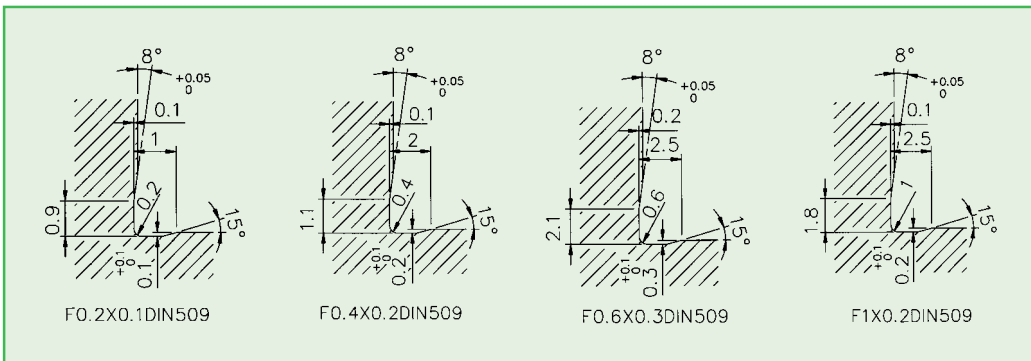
Suggested chamfer dimension per DIN 509 for the "A" dimension in Fig 4.10
